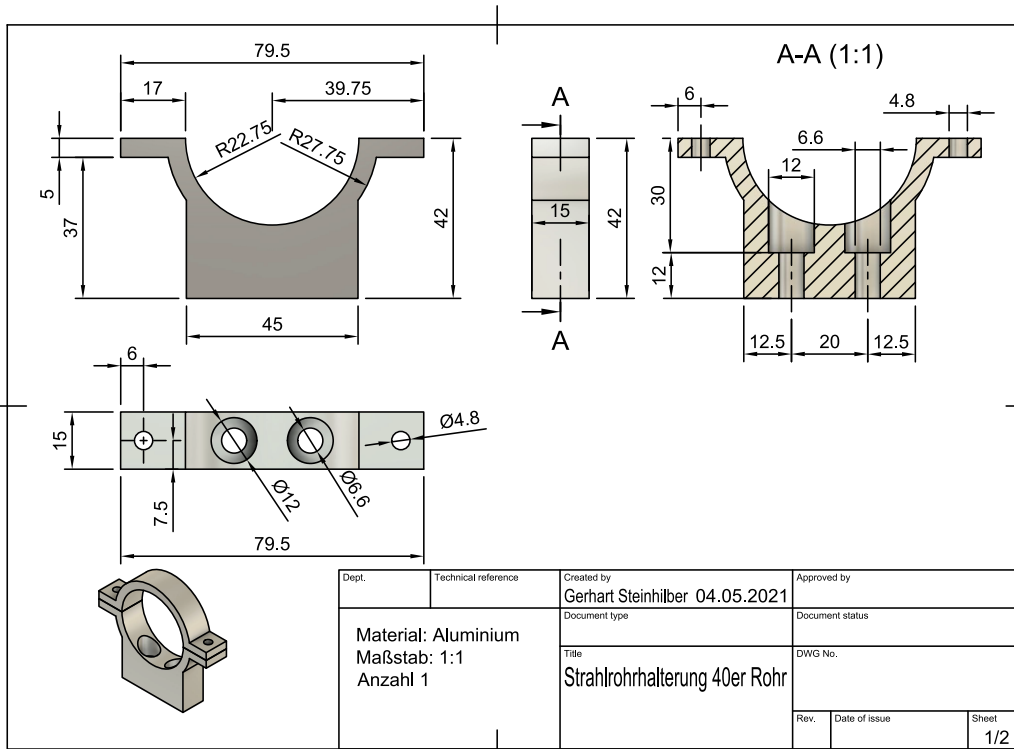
Technical drawing of the lower half of the small beam pipe holding clamp.
